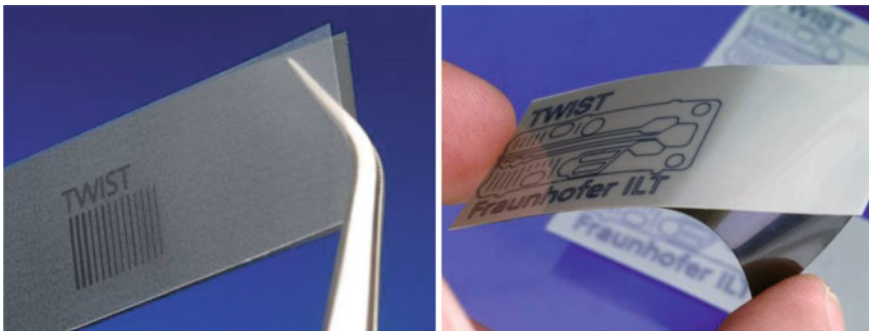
TWIST[®] welding of Polypropylene foils with a thickness of 100 μm
